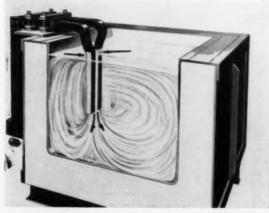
One type of salt bath furnace construction with electrodes entering at top and metal pot used to contain the salt.
